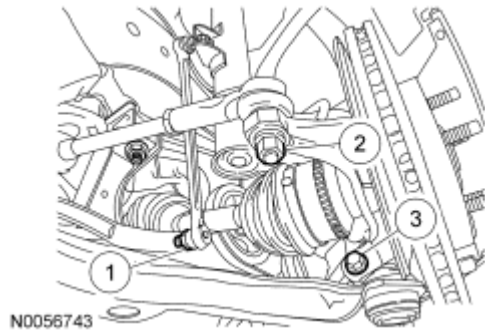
Identifying Stabilizer Bar Link, Retaining Nut, And Knuckle Bolt
